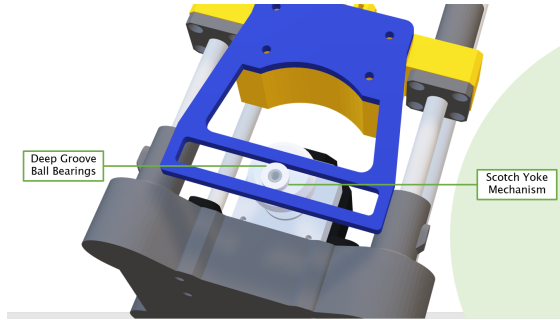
The linear bearings hold the primary mass and actuated base, hence reducing friction in the system.
